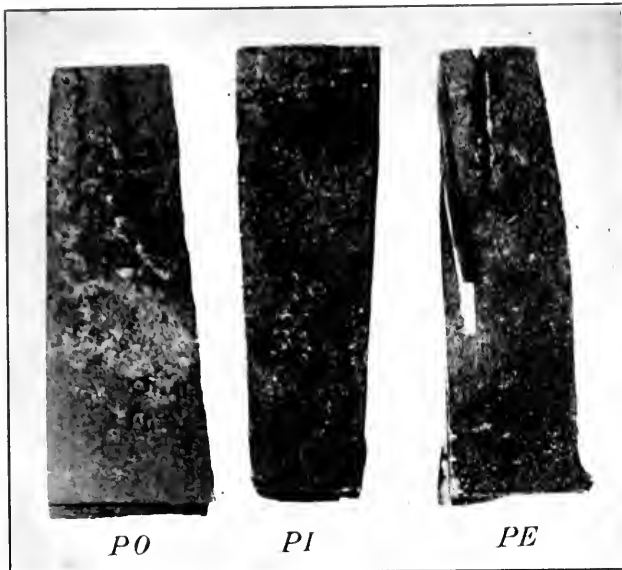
CRACKS IN SPECIMENS OF CYLINDER NO. 1 REVEALED BY ETCHING AND THE CRACK IN SPECIMEN PE WHICH PROBABLY CAUSED FAILURE; MAGNIFICATION 1.5
